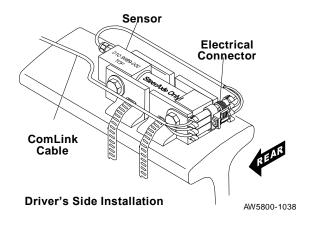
Placing the ComLink Cable for a Driver's Side Hookup
